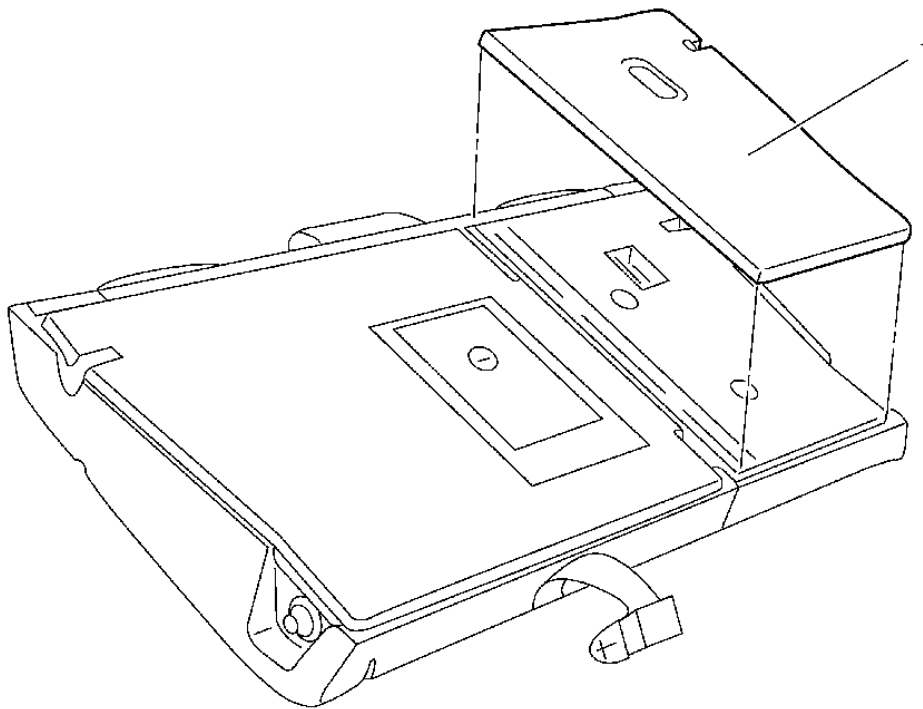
Rear Seat Back Cushion Carpet (40% Side)
